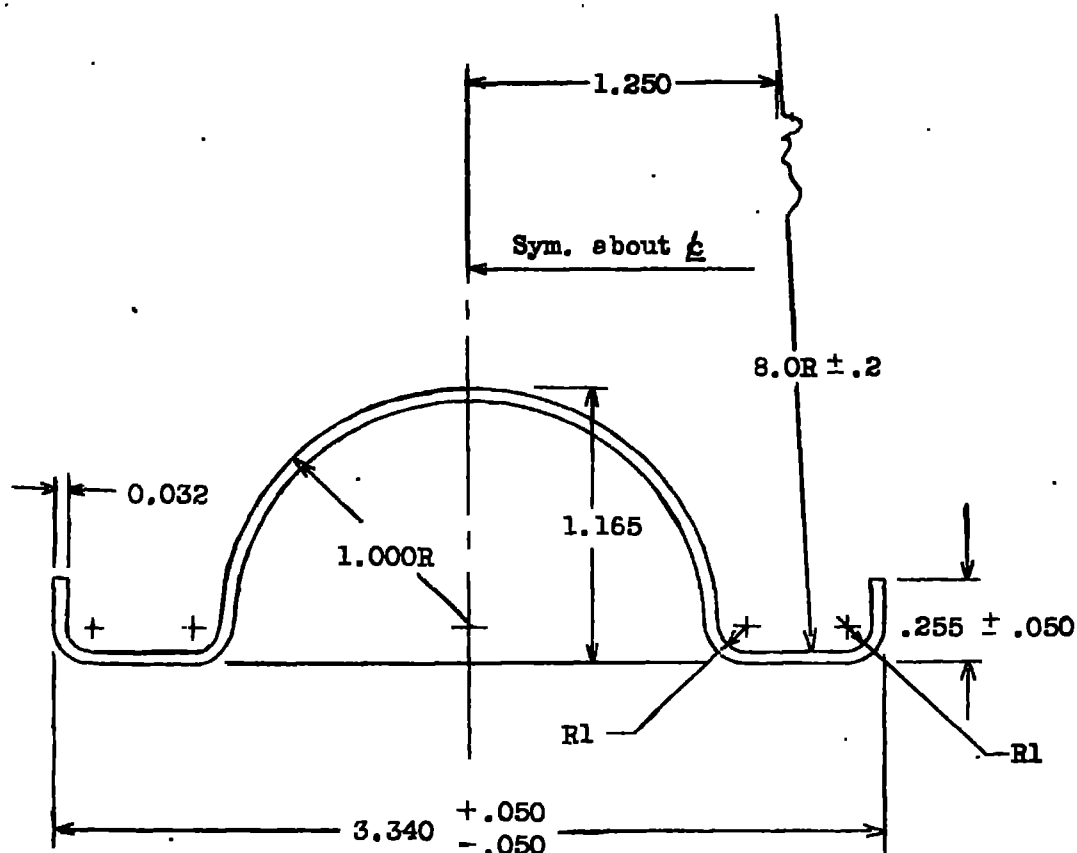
Dimensions of Curtiss-Wright bat-shaped stiffener.
